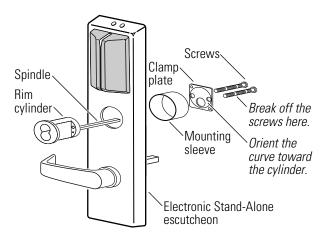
Removing and reinstalling the rim cylinder for Von Duprin installations (B.A.S.I.S. escutcheon shown)
